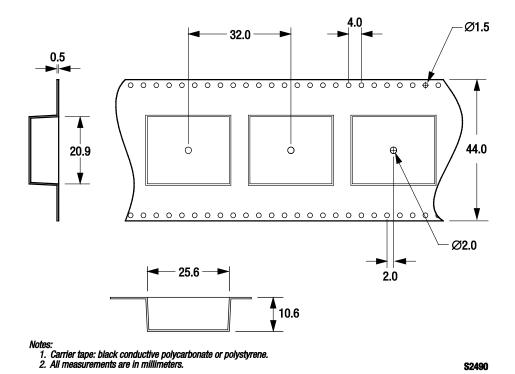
MAFR-000688-000001 Tape and Reel Dimensions
